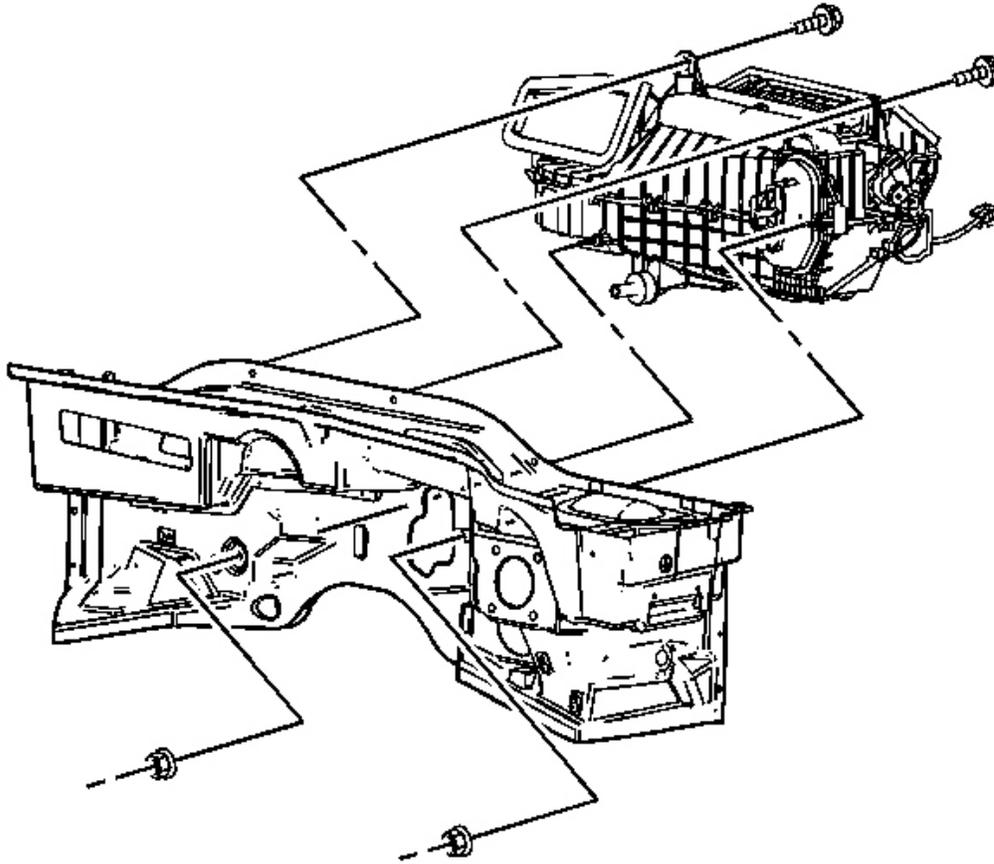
HVAC Module, I/P Cross Vehicle Beam & Components
